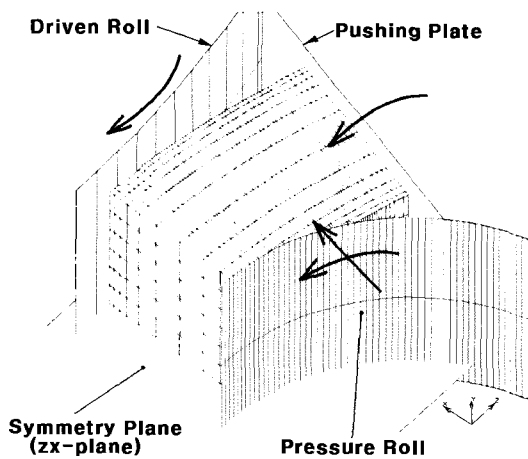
Initial mesh system and contact surfaces for plain ring rolling
